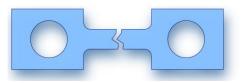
Expected post failure condition of designed miniature tensile specimen showing the failure in the gage section
